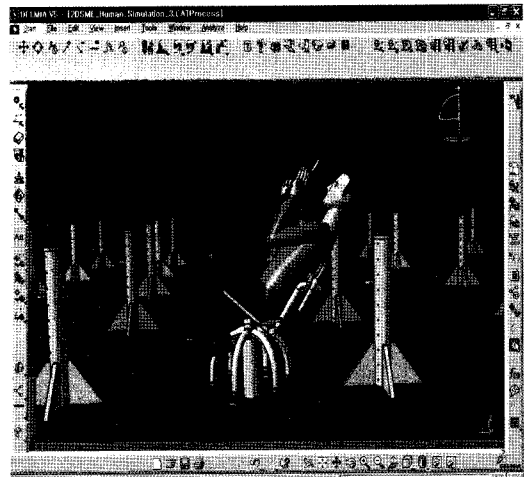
Model of Upward Welding in a Sitting Position(Improved).
